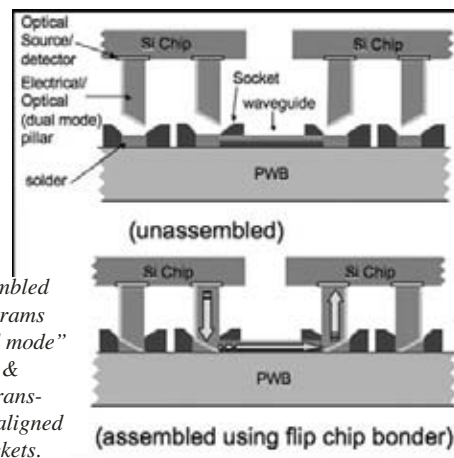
Unassembled & assembled diagrams for slant tip "dual mode" pillars for optical & electrical signal transmission held and aligned by board level sockets.
